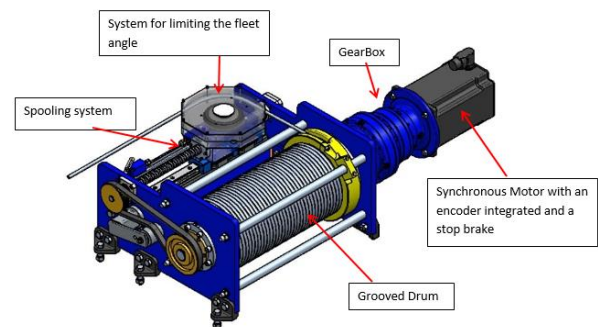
CAD view of the VICINAY Winch WB21.L30S.1
